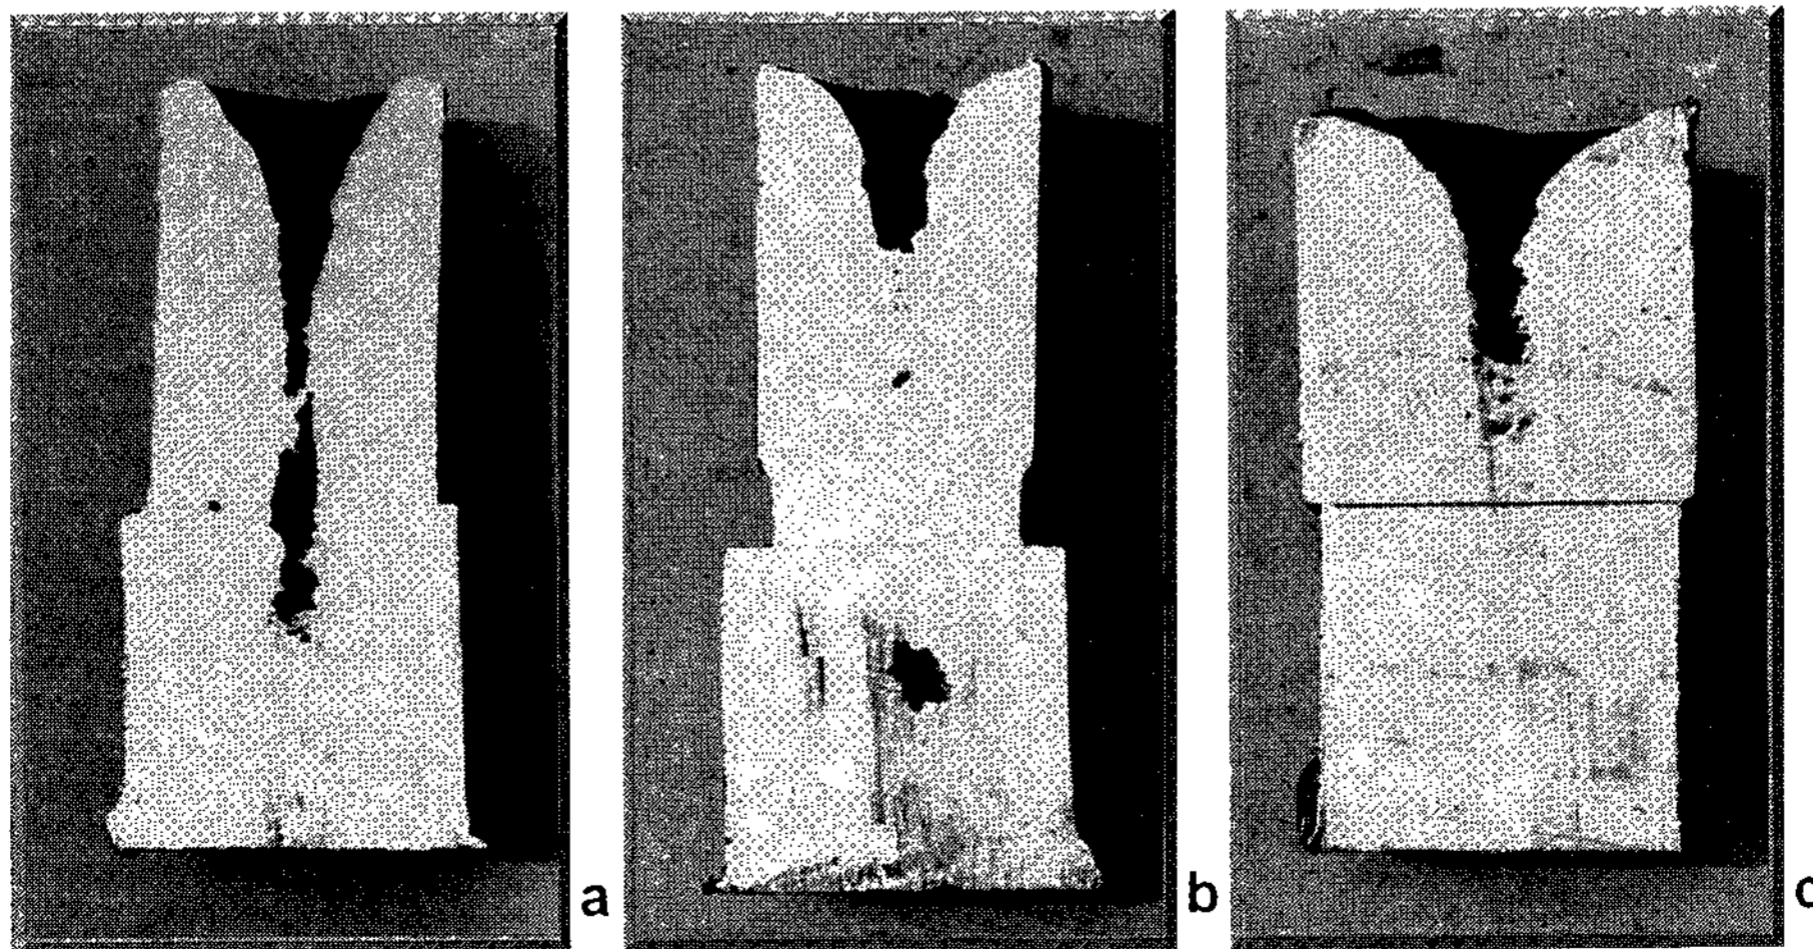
Formation of shrinkage cavities in cubic shaped stainless steel castings solidified in a sand mold; (a) Johns ①, (b) Johns ②, and (c) Pellini and Obata method.
